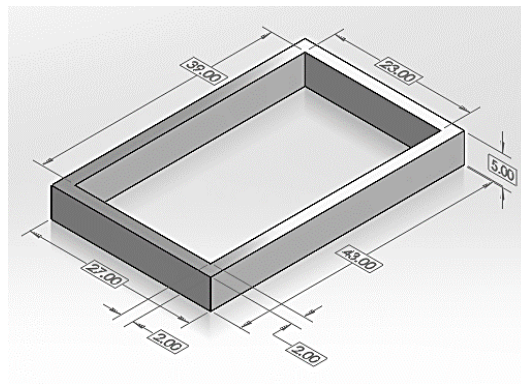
Dimensions of encapsulant gel containment box designed in SolidWorks for 3D printing.
